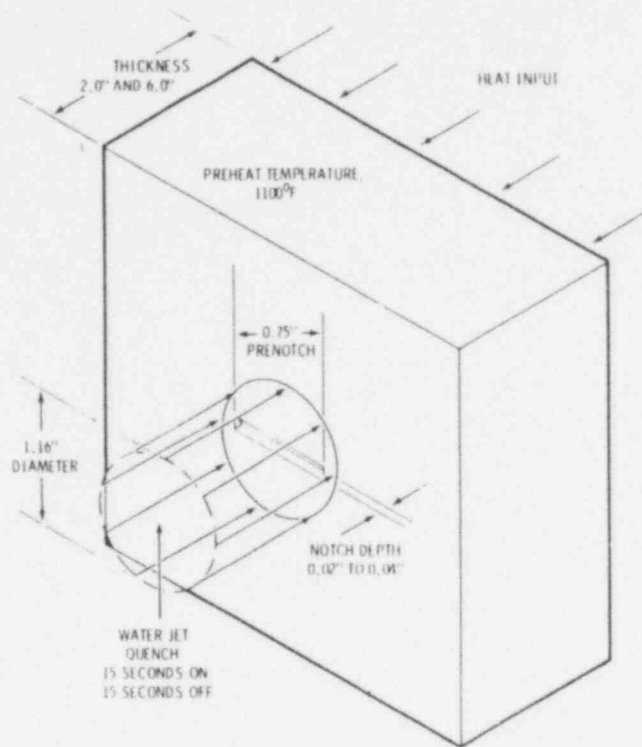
Thermal Fatigue Cracking Specimen
